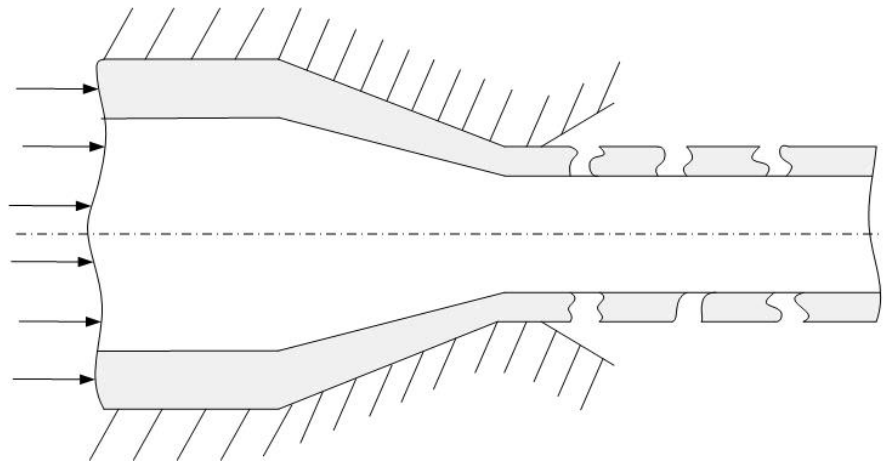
Cohesive failure of polymer coating during composite rod extrusion
